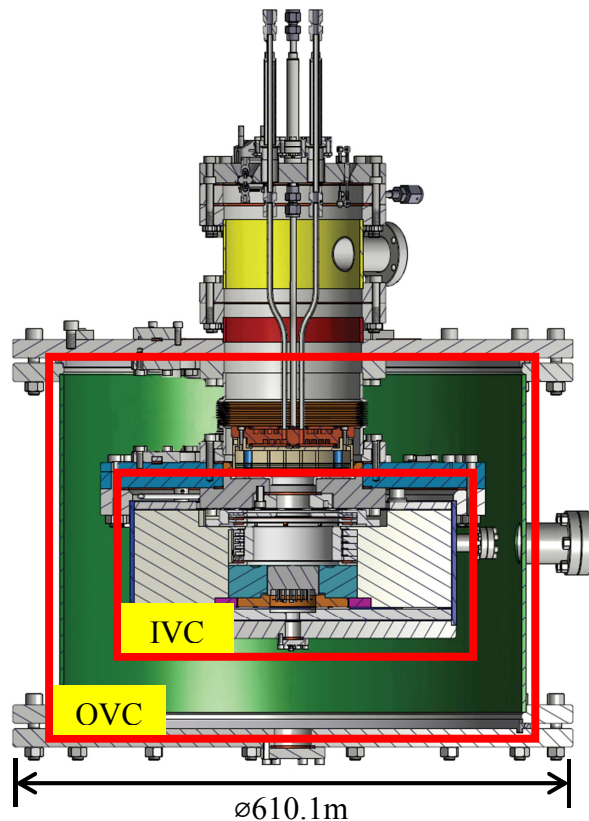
Technical drawing of the OVC and IVC. Also visible is the future GPM detector in the Teflon block. The linear manipulator, cryocooler with cooling rod and cooling fins and the heat exchanger have been removed for clarity.
